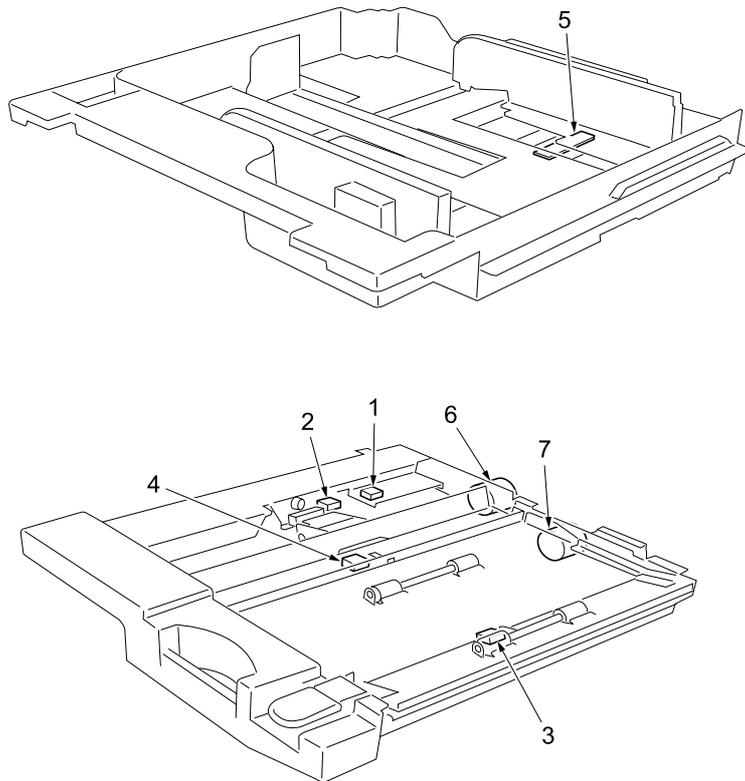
Paper feeder inside and primary paper feed unit
